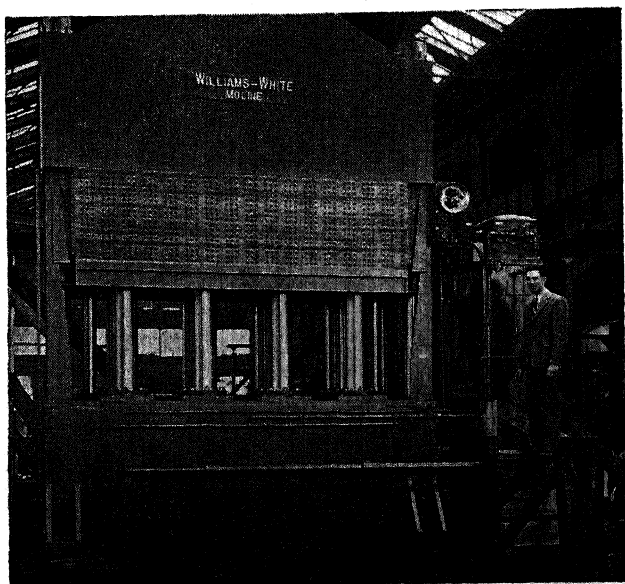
Deflection of top and bottom beams of this 819-ton hot plate press is minimized by use of welded steel construction.
